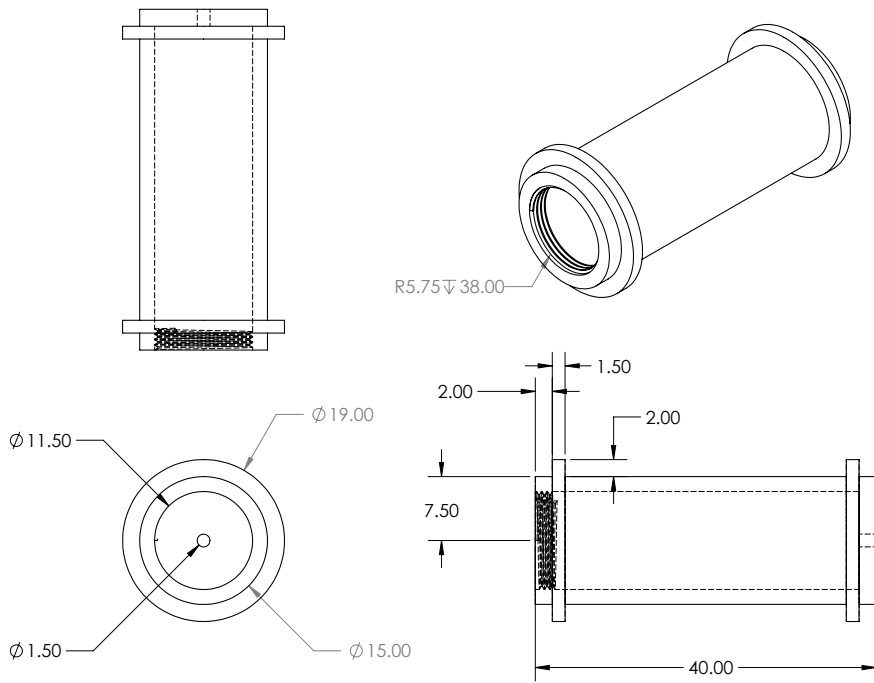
Schematic drawing of the piston body (Units – millimeters).
